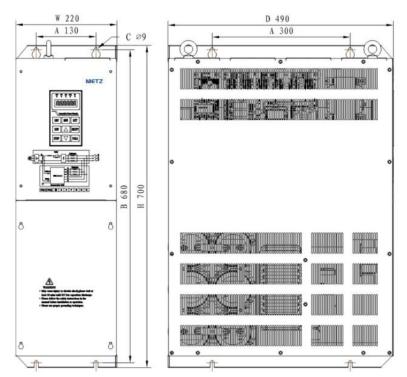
C5 wall-mounted chassis dimensions and installation dimensions
